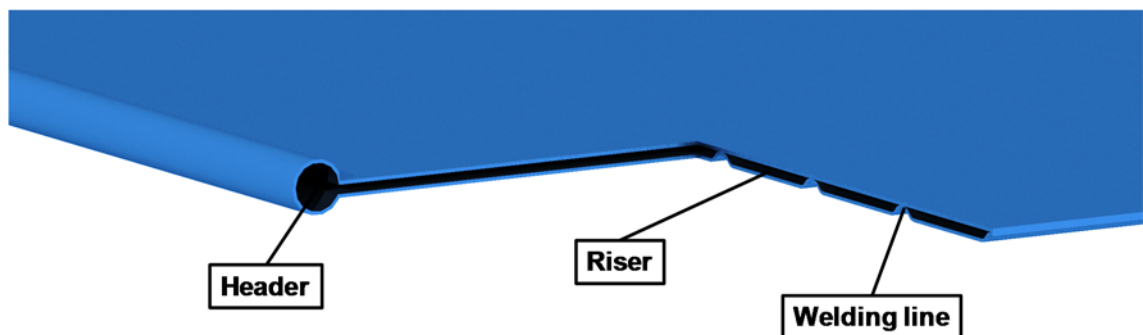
Sectional view of a twin sheet thermoformed absorber
